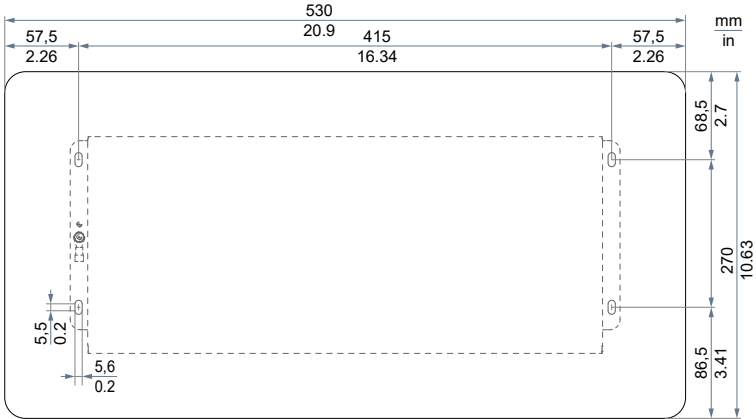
Dimension drawings: Example of a non-PoE device variant with 20 ports
